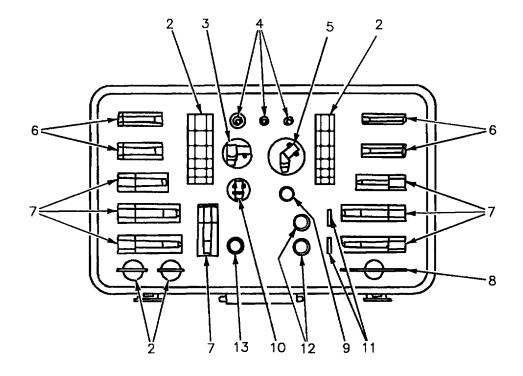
Adapter Set, Tank Sealing (Sheet 1)
